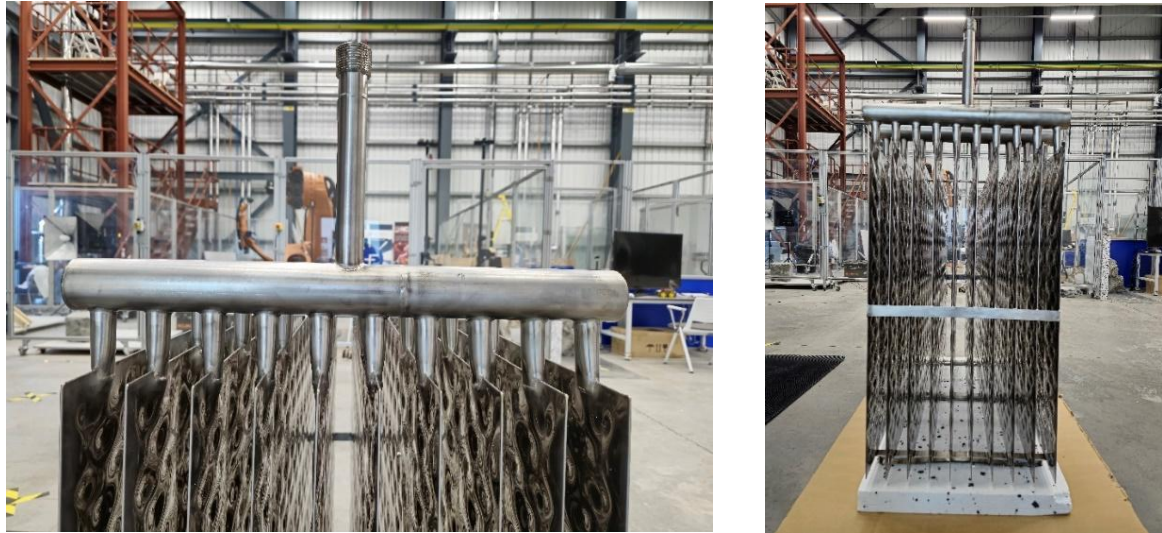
Photographs of the pillow plate bundle depicting the plates, pipes, manifolds, brackets, and stands: (left) close-up of the pipes and manifold and (right) front view of the region close to the pipes.
